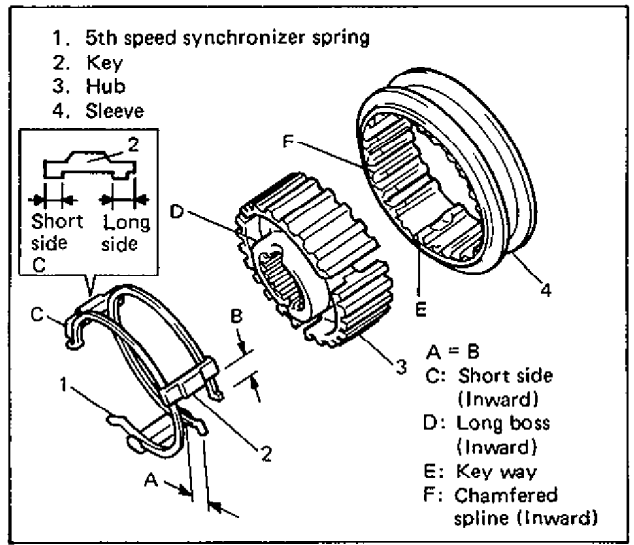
A-88 Assembling 5th Speed Sleeve & Hub
